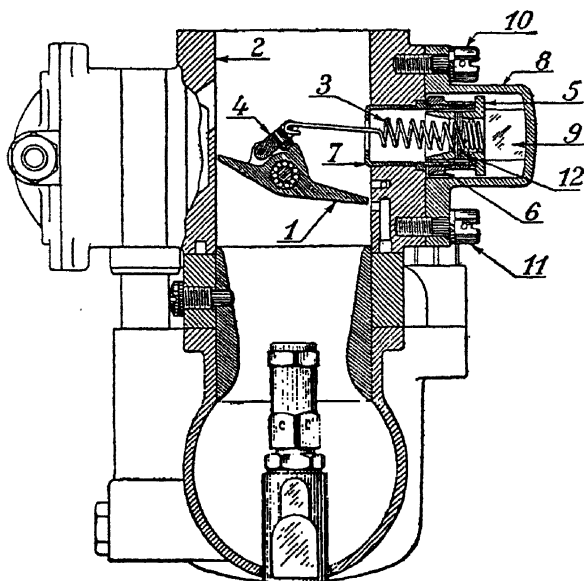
The Vertical Model Solex Governor Thermostarter Carburettor.
